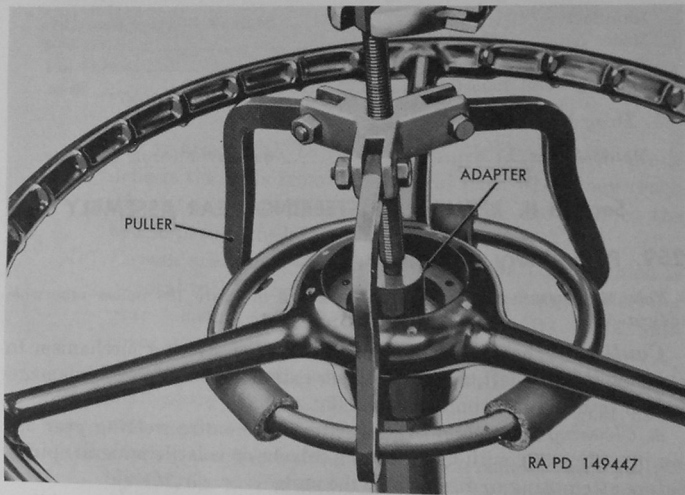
Removing steering wheel using adapter 41-A-27-430 with puller 41-P-2954.
